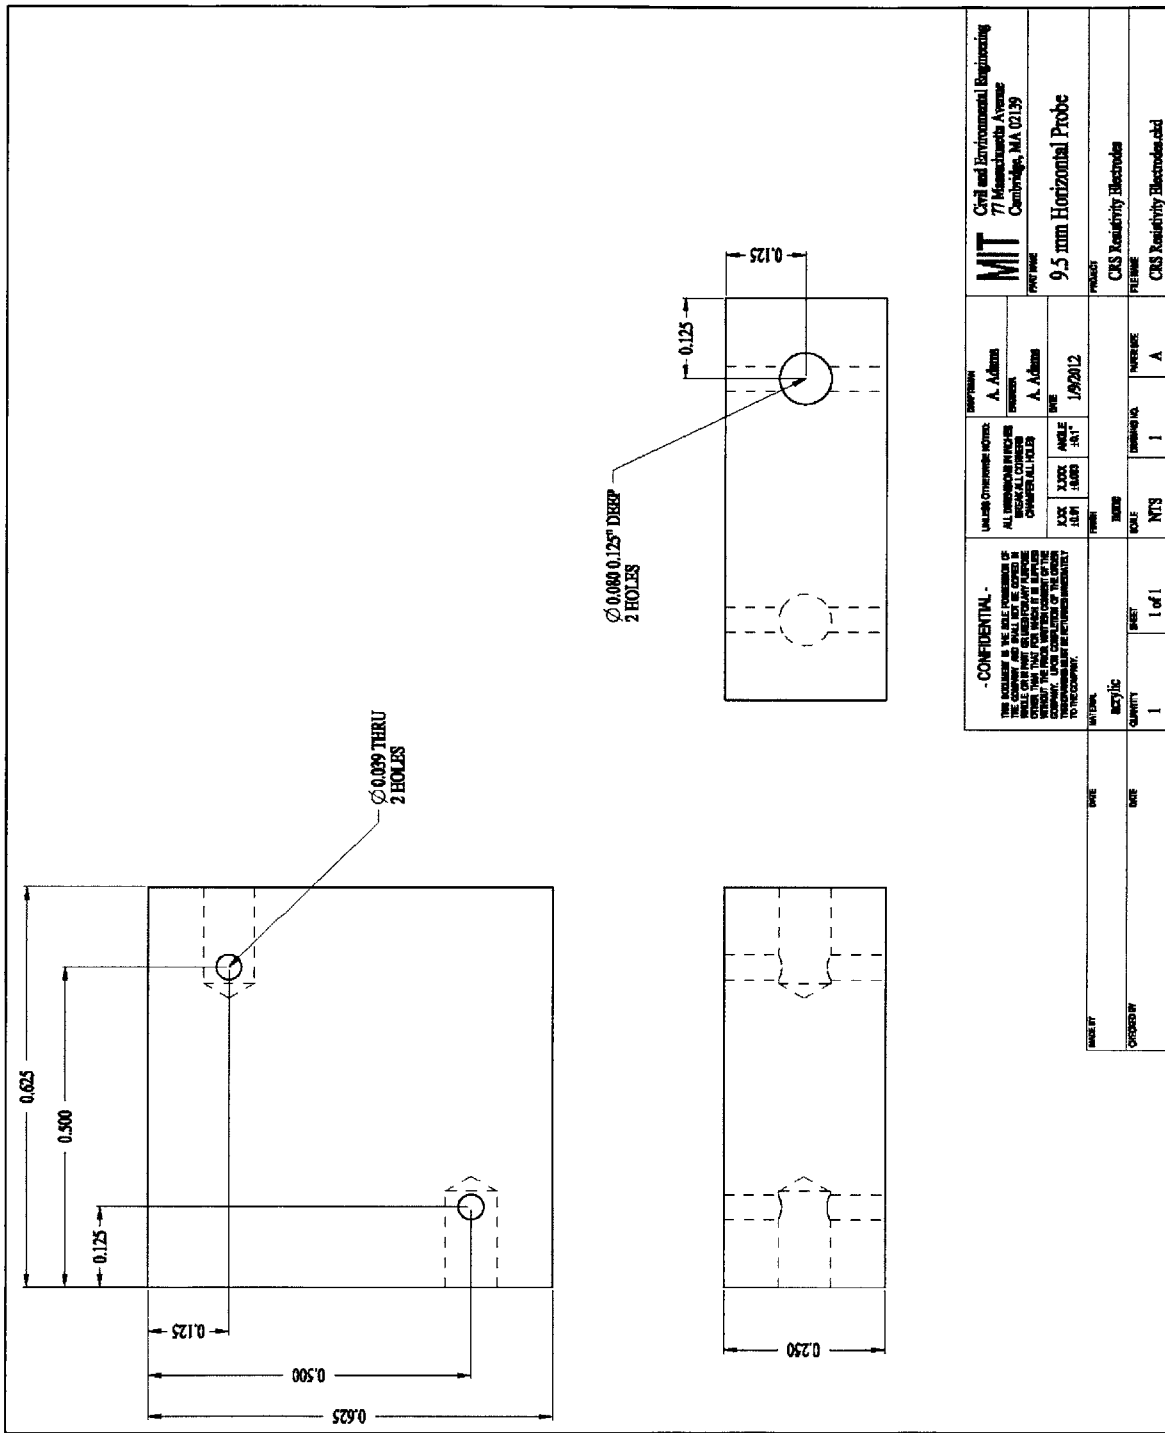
CRS Electrodes: Drawing 1, 9.5 mm probe
